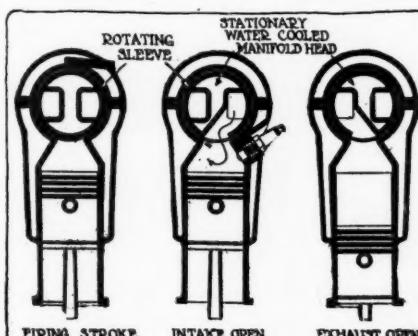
Jaeger motor, showing positions of mechanism for firing, intake and exhaust
